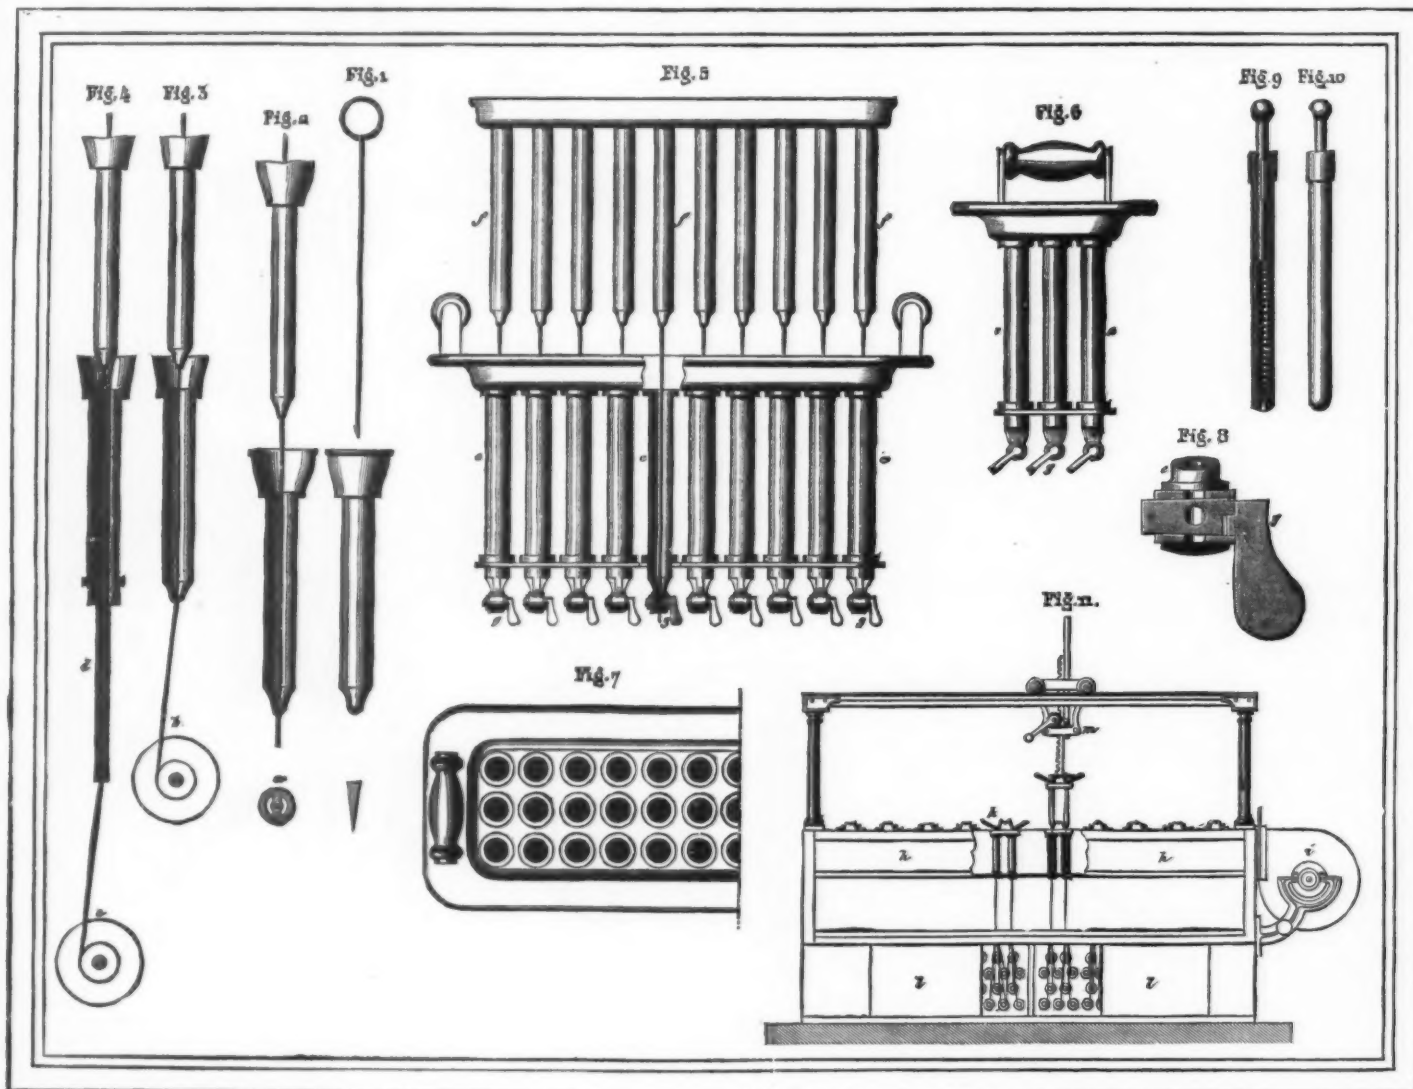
PLATE I.—MORANE'S CANDLE-MOULDING MACHINES
